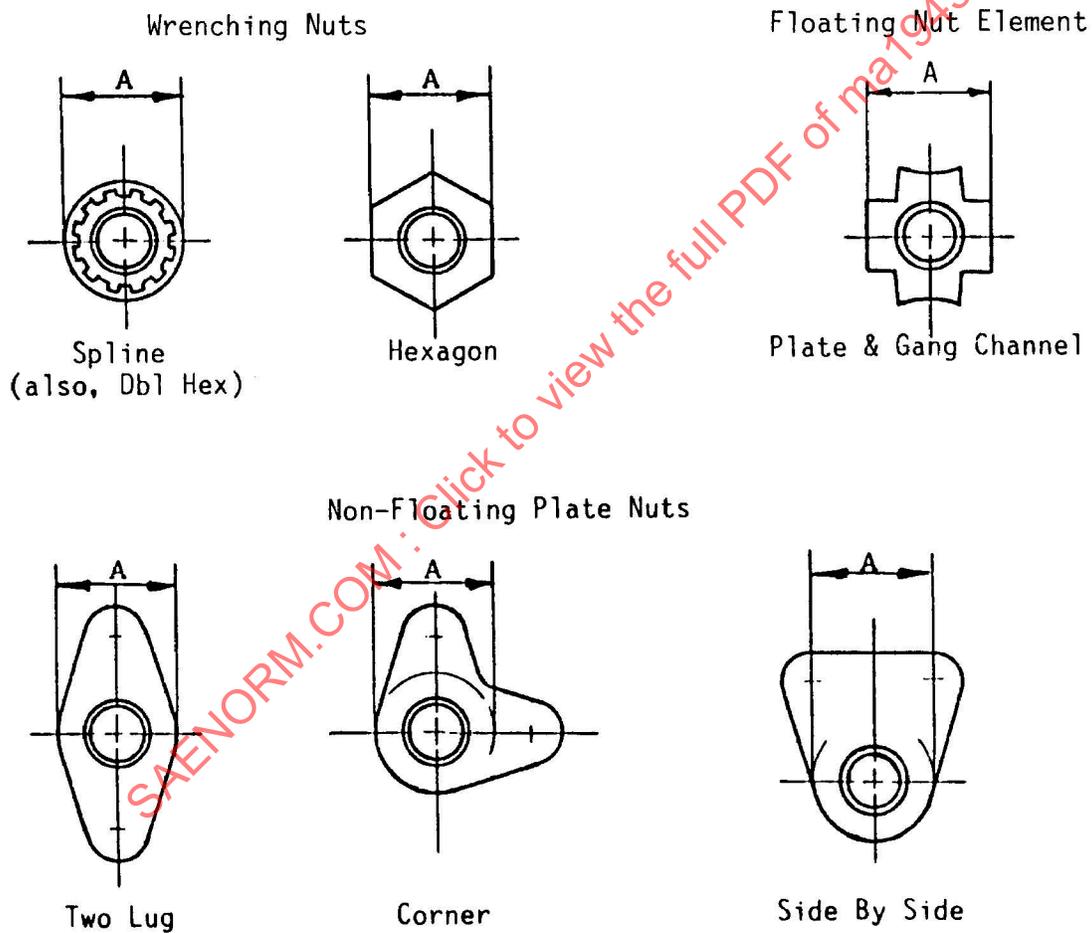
Bearing Surface Area "A" Under Perpendicularity Control for Various Types of Nuts
